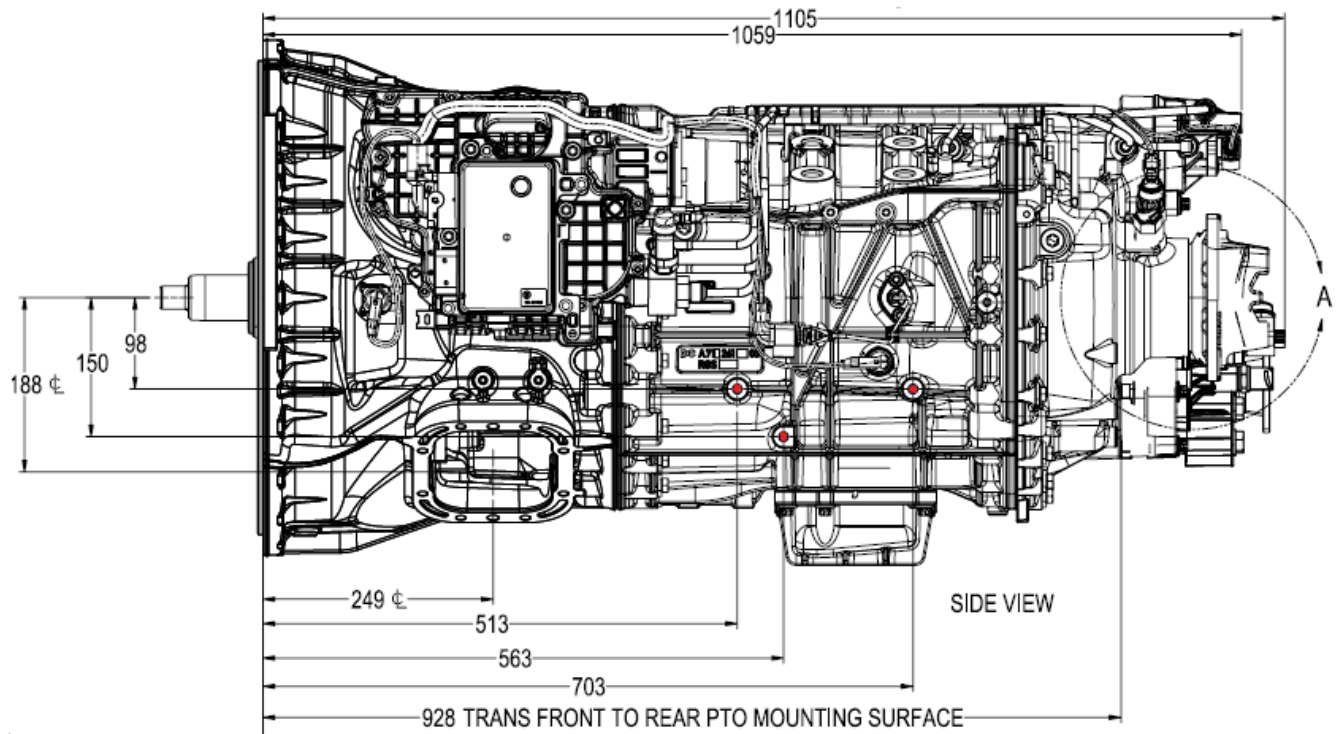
Mid-housing dimensions (in mm) for Bottom PTO Support Bracket
